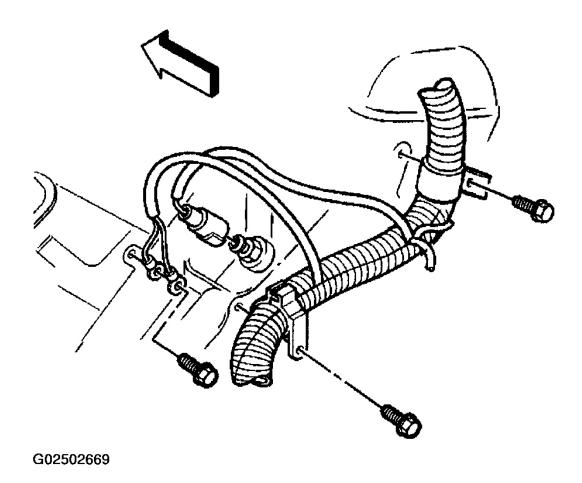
Locating Ground Wire & Engine Wiring Harness Clips Courtesy of GENERAL MOTORS CORP.
